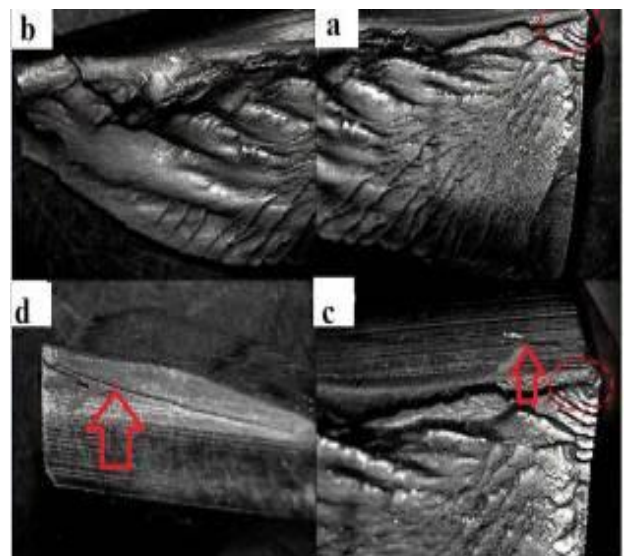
(a, b): Stereomicroscopy image of wave-like fracture and (d, c): cracks in sample 2
